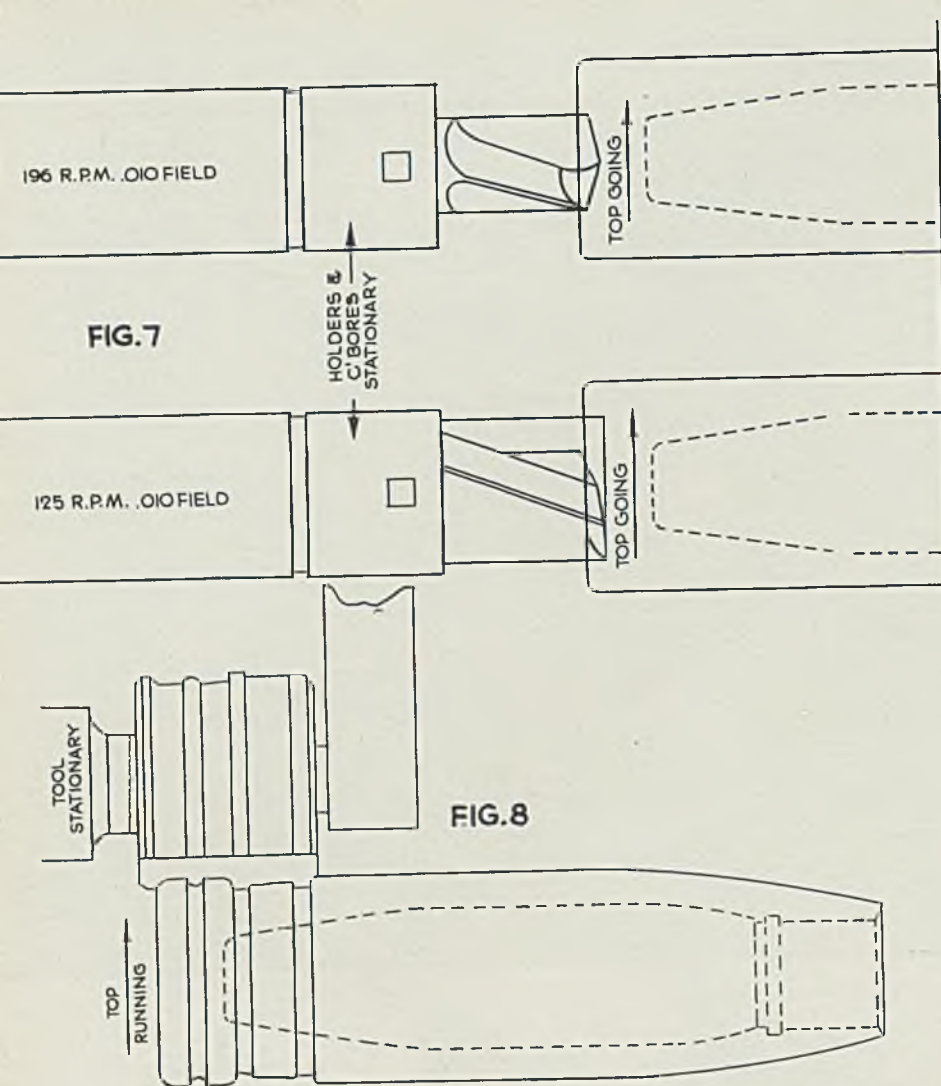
A successful method of roughing and semi-finishing base cap counterbore as used on a multi-spindle screw machine, employing a Wesson snap lock holder
